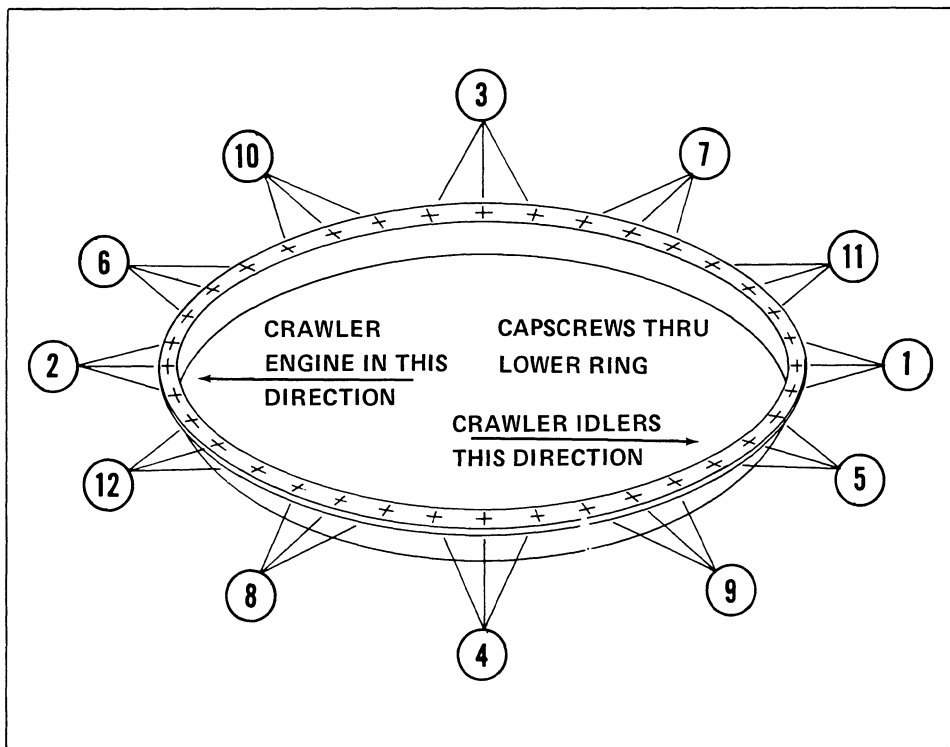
Proper Sequence for Torquing Bottom Capscrews - Turntable to Weld Ring Connection
